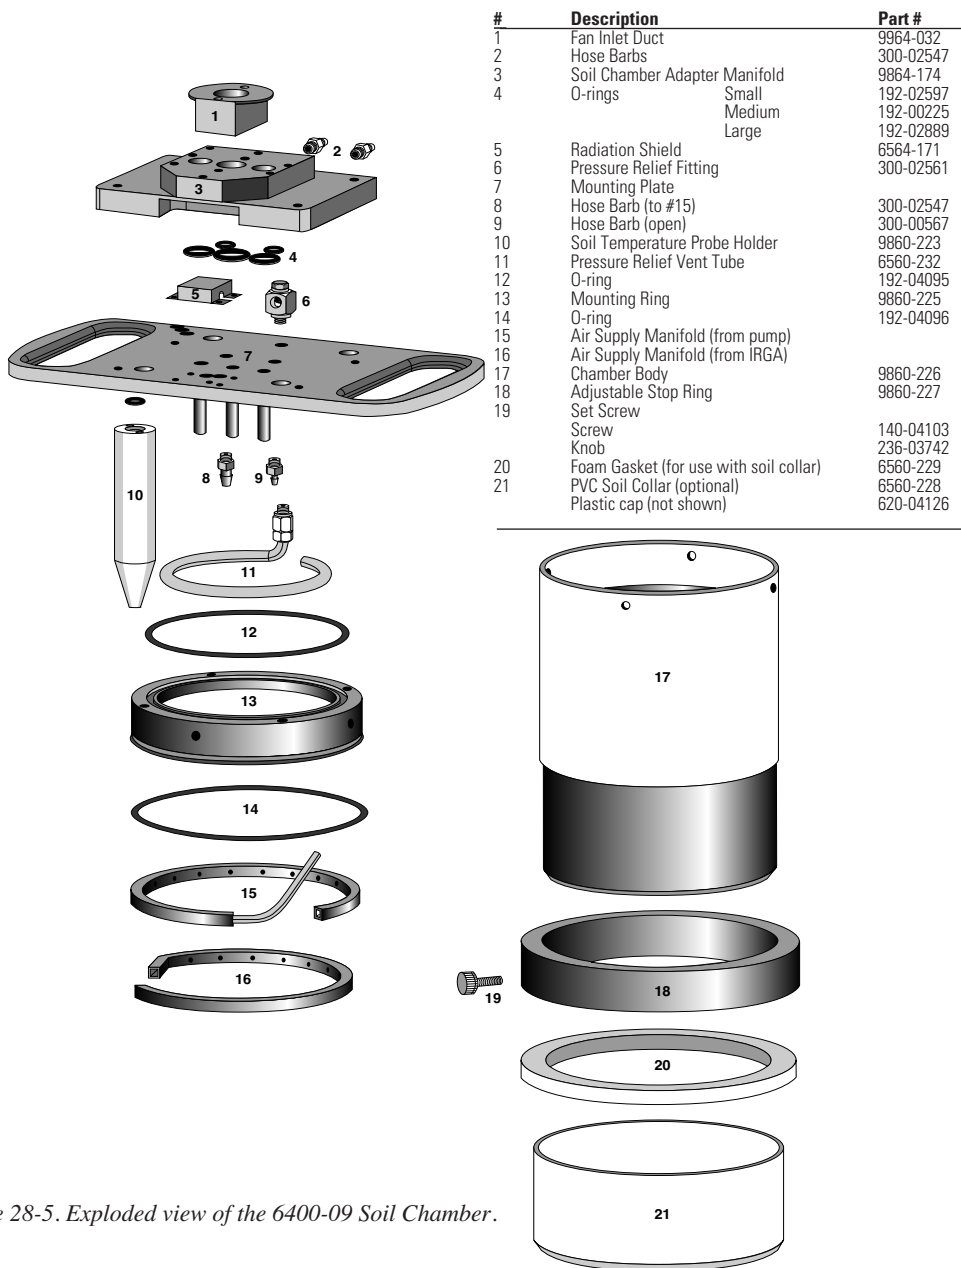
Exploded view of the 6400-09 Soil Chamber.
